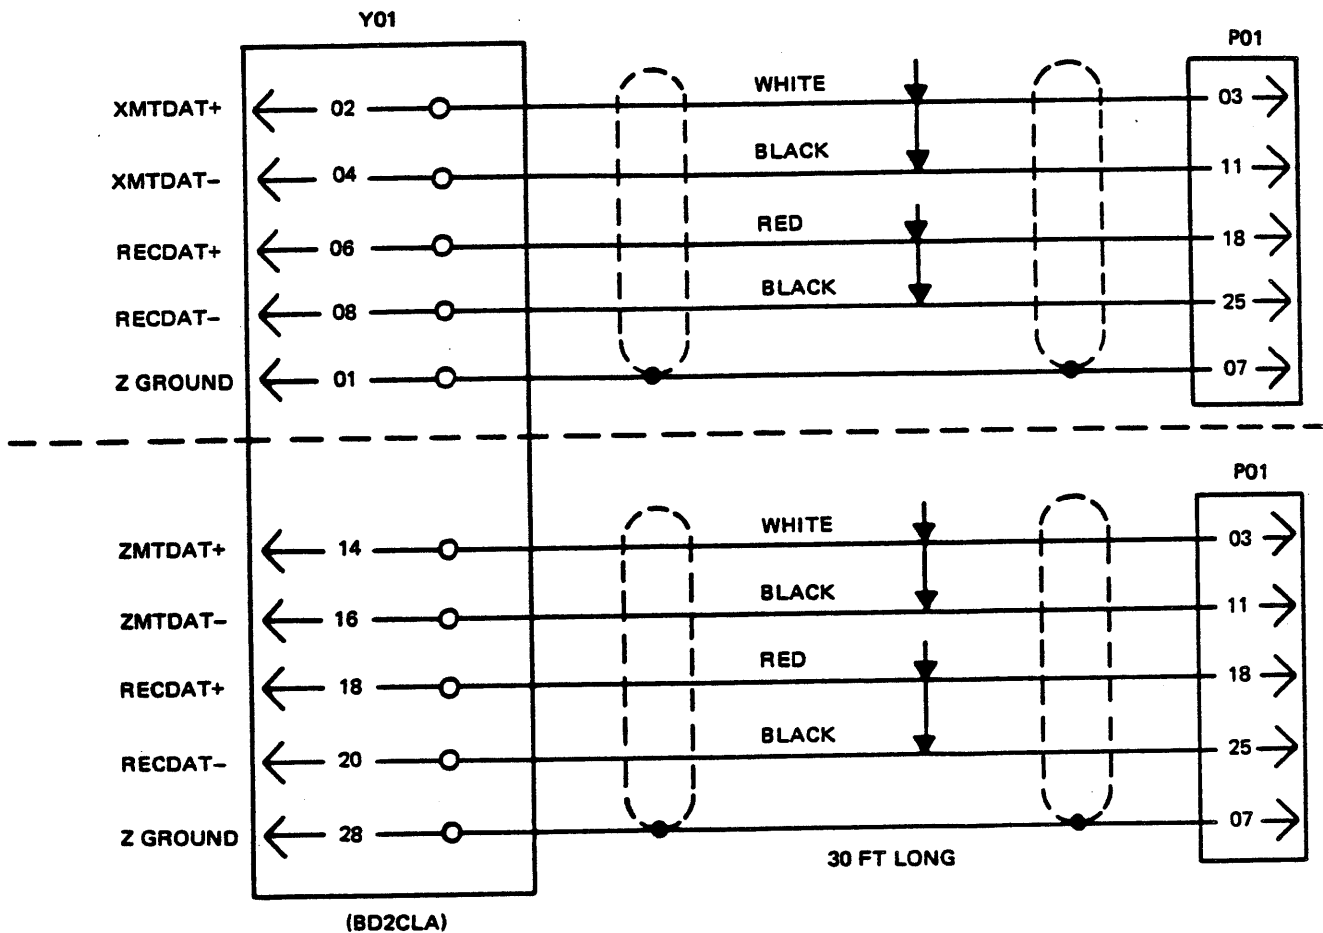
Wiring of Current Loop Adapter Cable (60132380-001)
